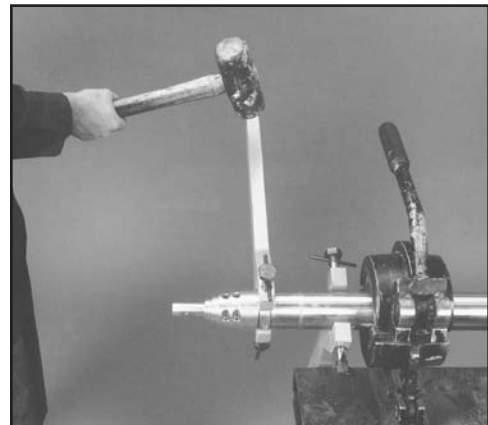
UNSCREWING THE FRONT CASING AND CHISEL
